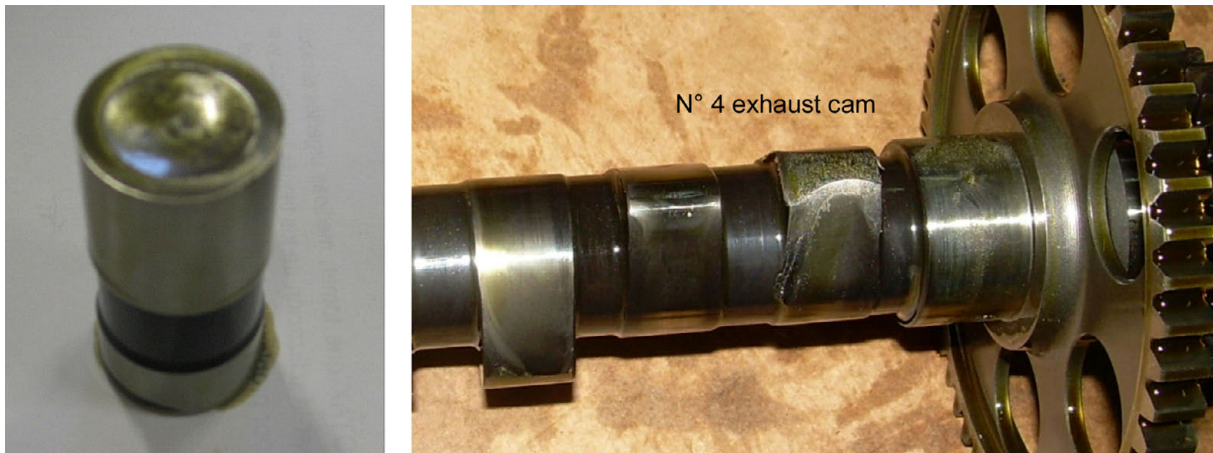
Hydraulic tappet and camshaft cam from exhaust valve cylinder n° 4 on aircraft EC-IZC
